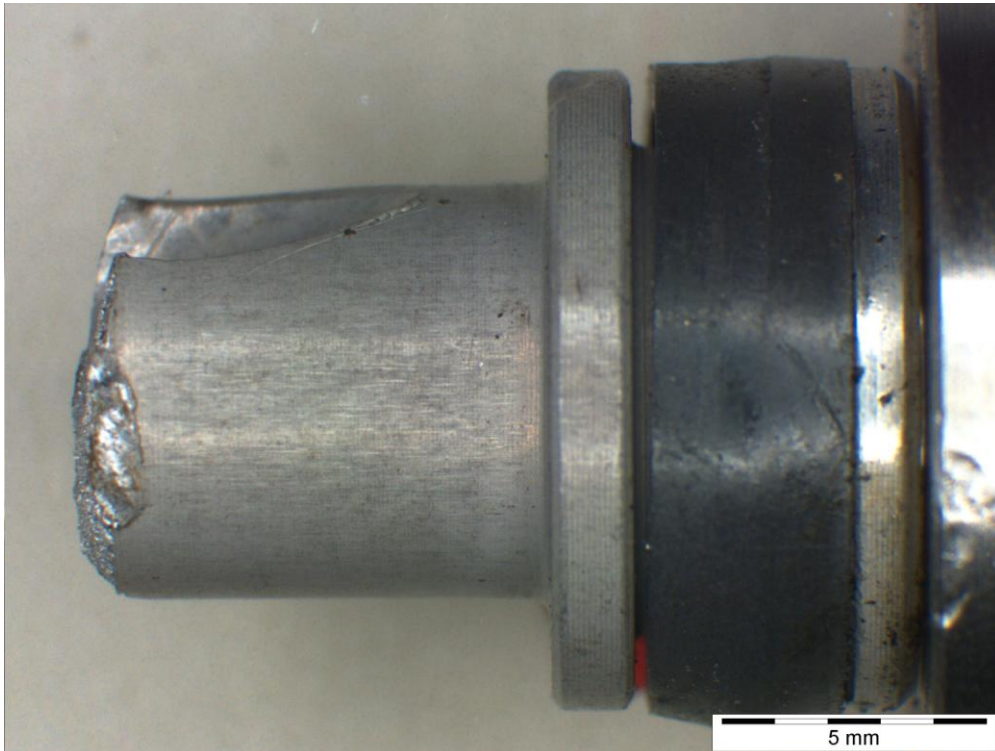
Fracture part B; Side view. At the edge the fracture surface is mechanical damaged.
